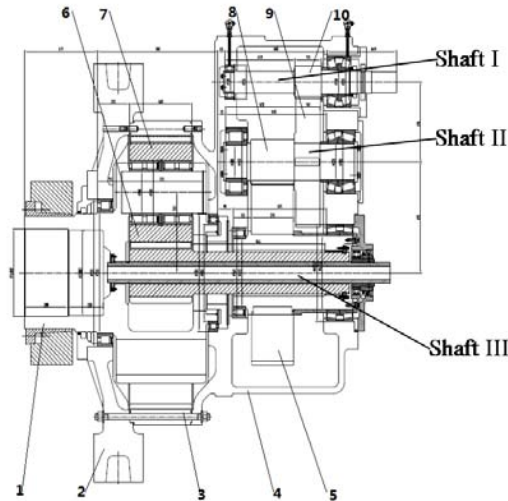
Structural drawing of gear box assembly, 1. planet carrier, 2: Torque arm, 3: Inner gear ring, 4: Upper and lower box bodies of ordinary gear train, 5: Level-II big gear, 6: Center wheel, 7: Planet wheel, 8: Level-II small gear, 9: Level-III big gear, 10: Level-III small gear
